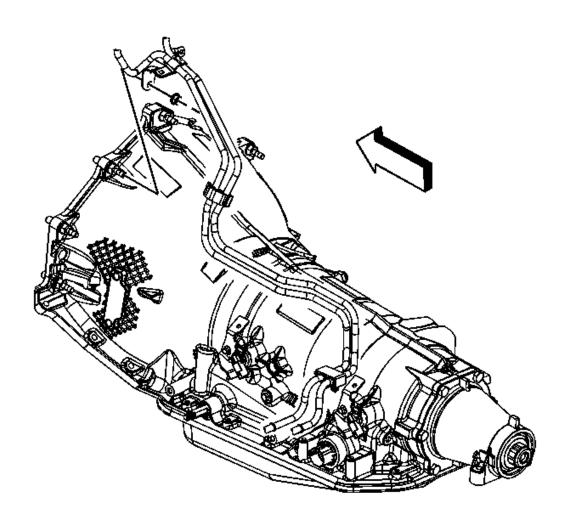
View Of Fuel/Evaporative Emission Pipe & Bracket Courtesy of GENERAL MOTORS CORP.
